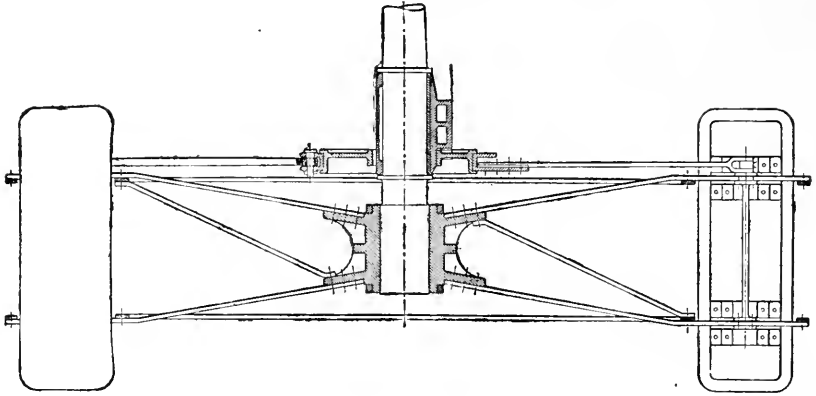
Feathering Paddle-wheel, Feathering Gear inside.
